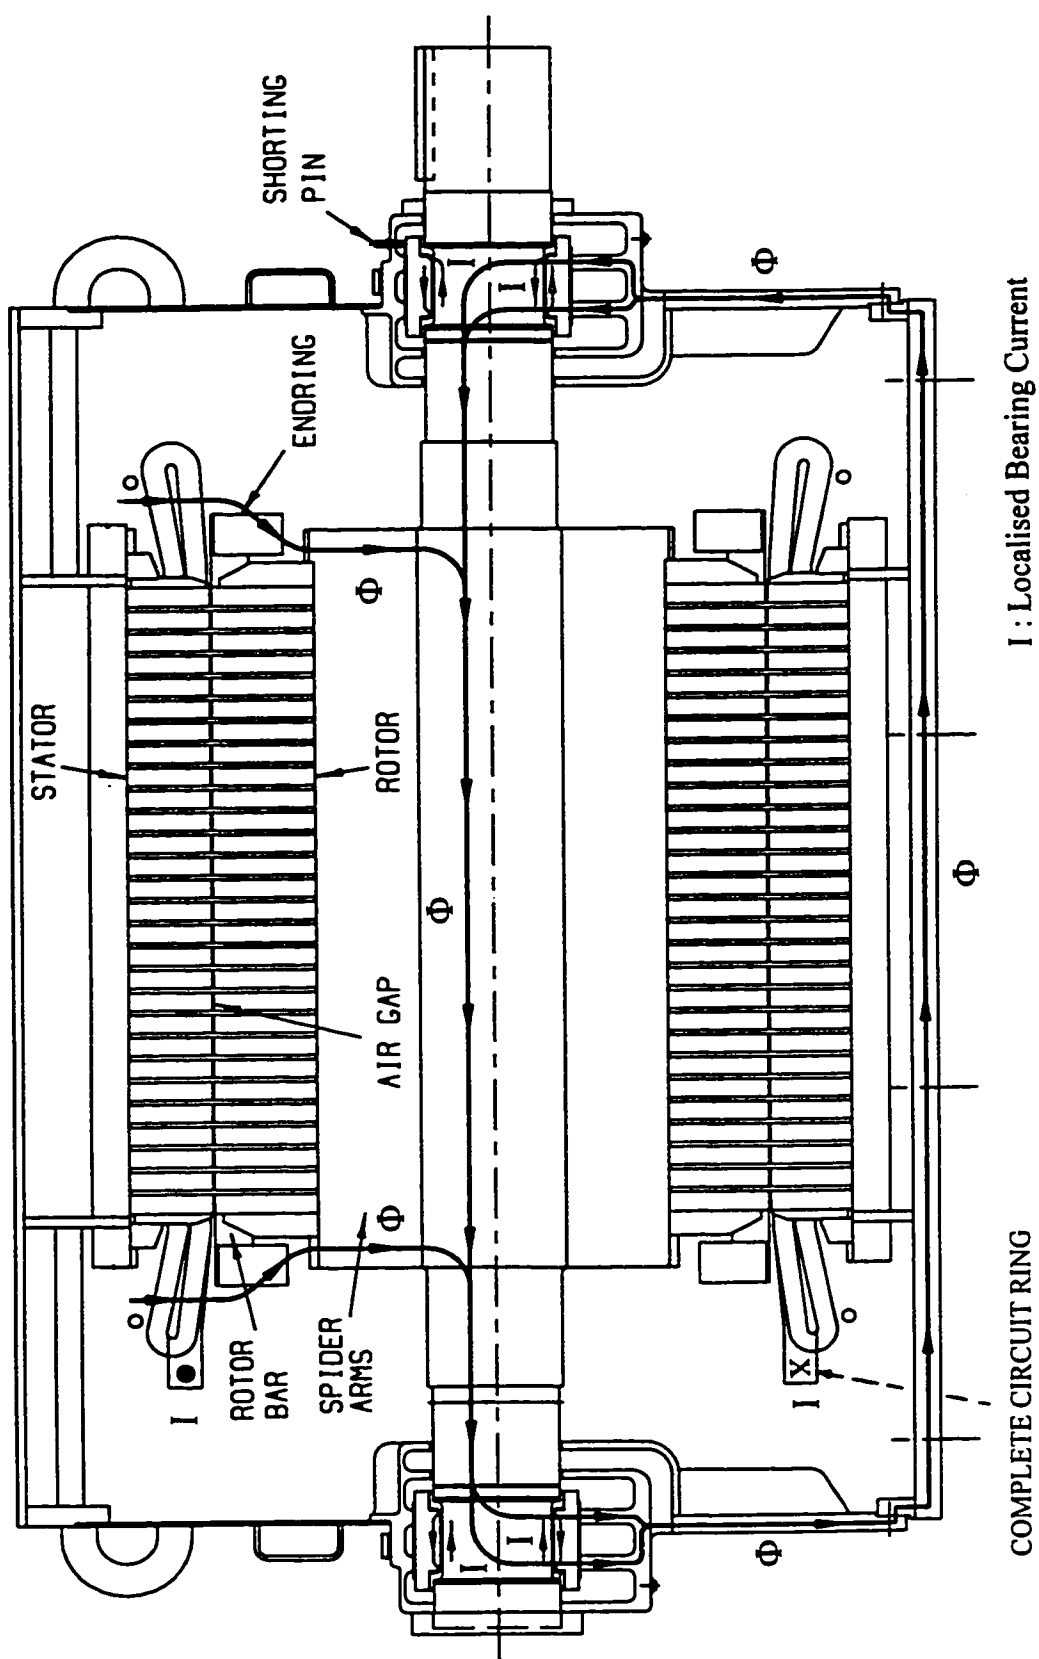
Localized Bearing Current Due to Shaft Flux
